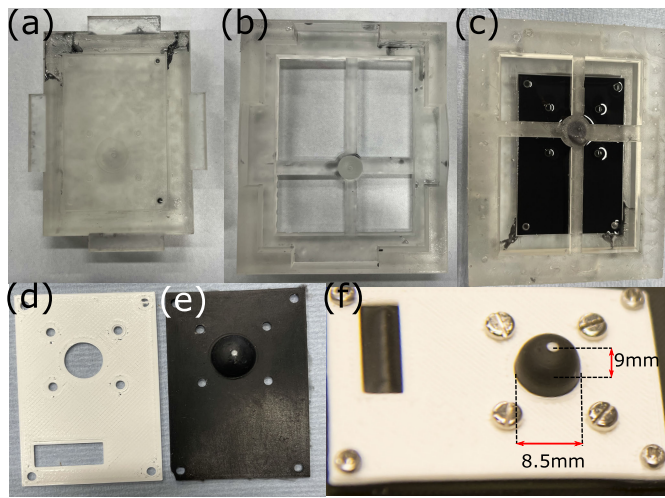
Fabrication and assembly of the LiVec sensor silicone pillar. (a) Lower mold for the pillar. (b) Upper mold for the pillar forms the pillar cavity. (c) Attached upper and lower molds during curing of the black silicone forming the pillar. (d) Top plate. (e) Final silicone skin. (f) Fabricated silicone pillar held by the top plate onto the sensing PCB and mounted onto a stand.
